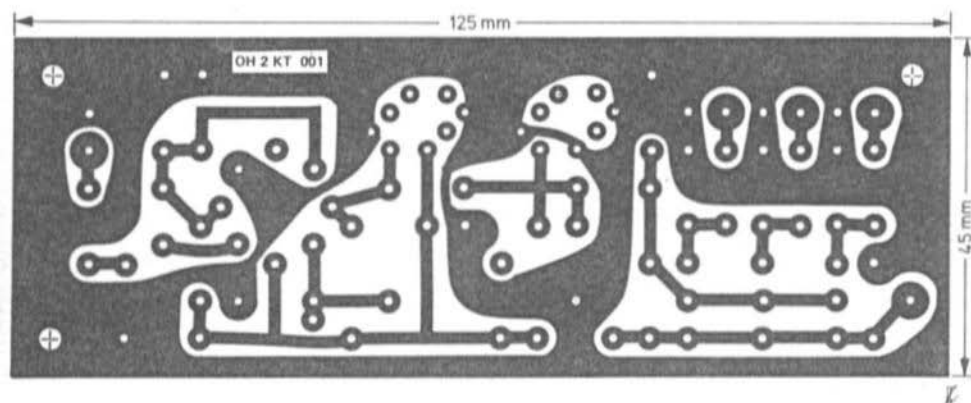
Printed circuit board OH 2 KT 001 and component locations
